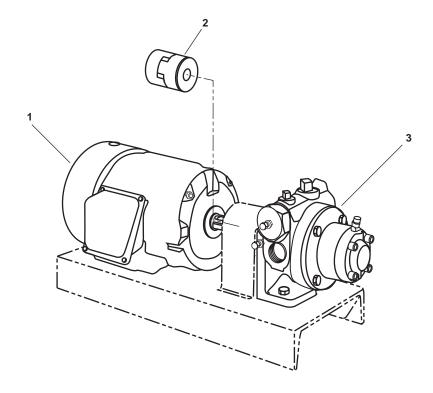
Fuel Oil Transfer Pump (Sheet 1 of 2)
